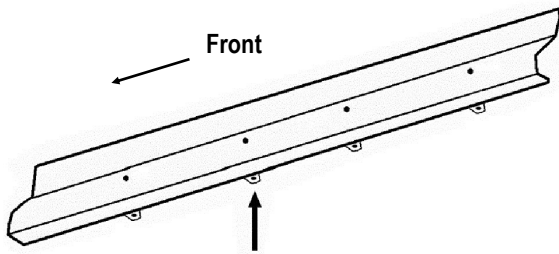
Passenger Front Mounting Bracket Installed (Weld Nut If Equipped-Also See Fig 2)
